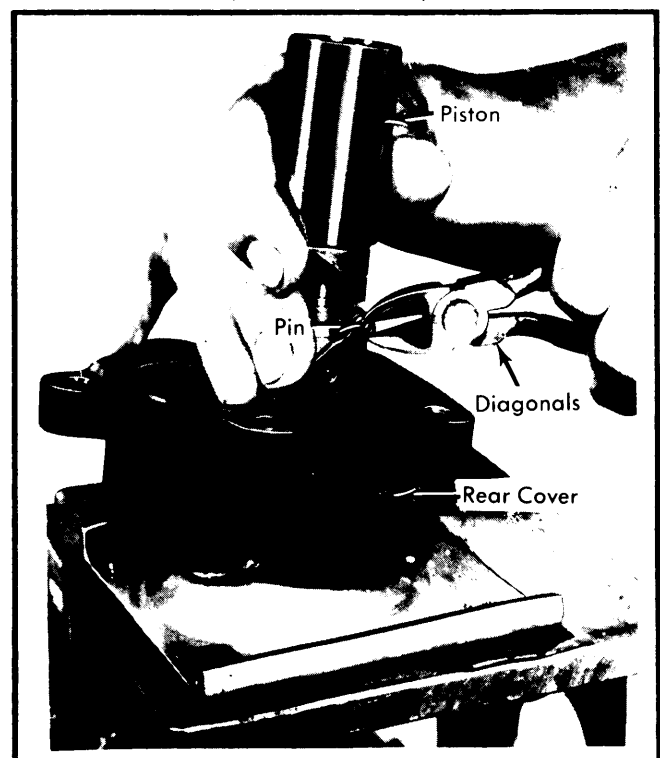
Using Diagonal Pliers to Remove Booster Power Pin (Cadillac Shown)
